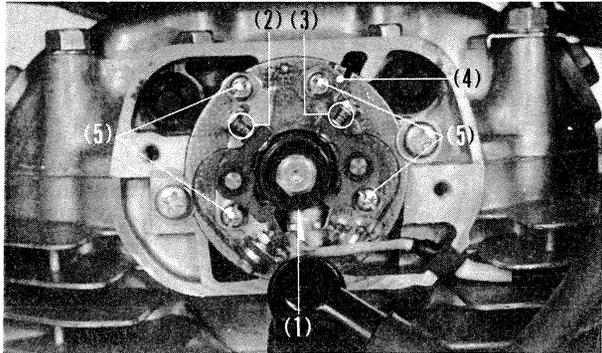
(1) Point cam (5) Contact breaker plate locking screw
